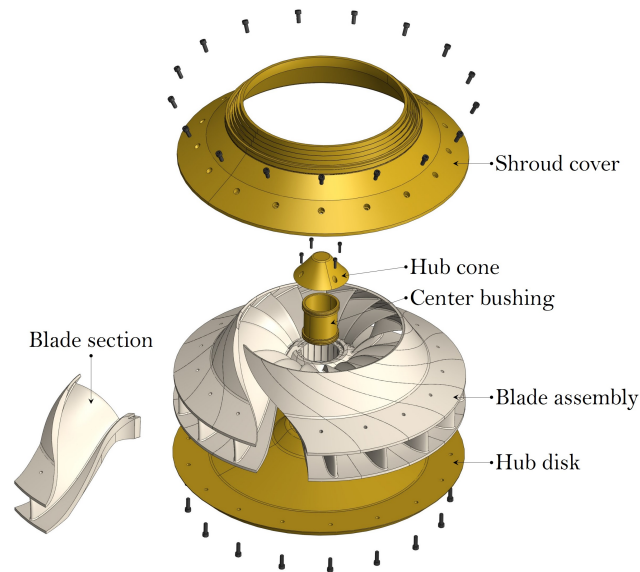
Exploded view of the F101 runner used for the experiments showing its method of assembly.
